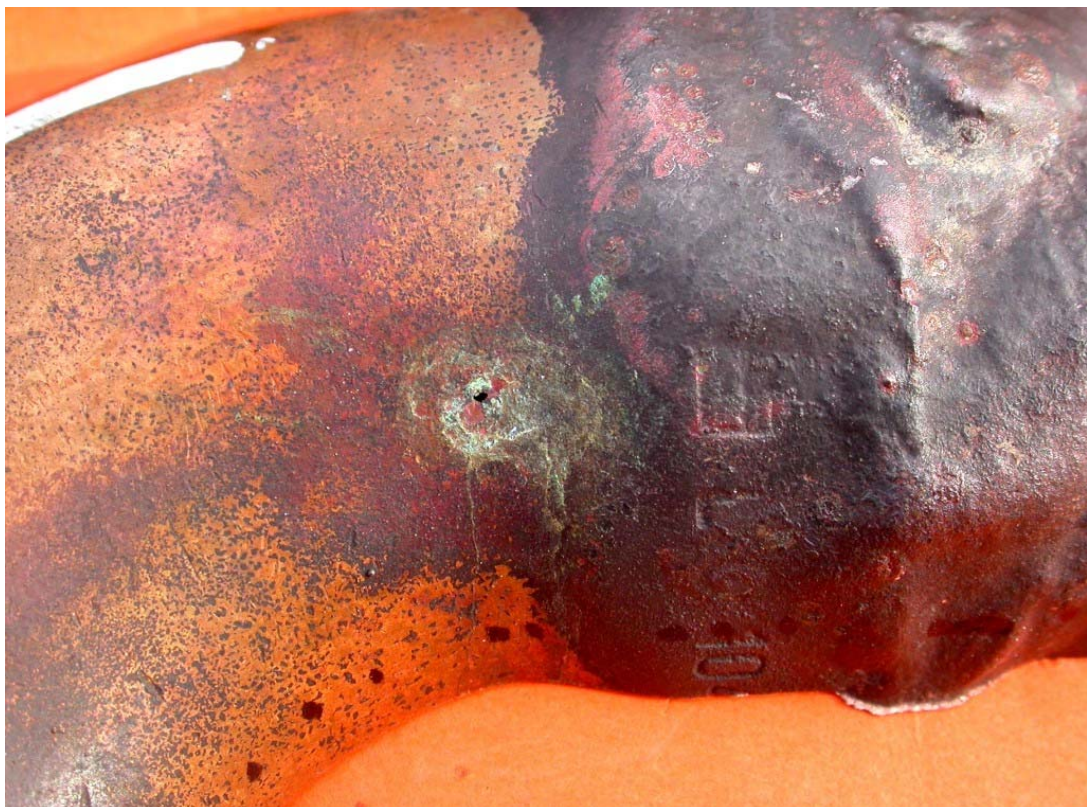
(a): Pinhole leak at bend, viewed from outside of pipe.
